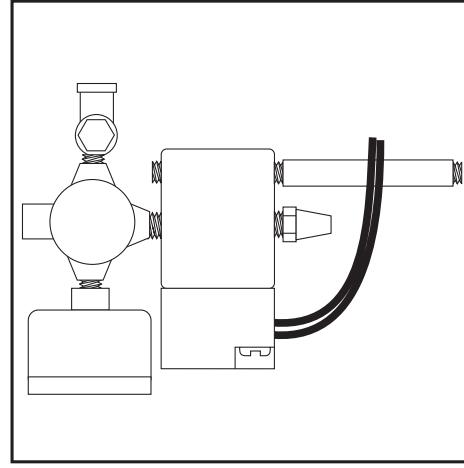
Top view of spindle lube/air solenoid assembly.
